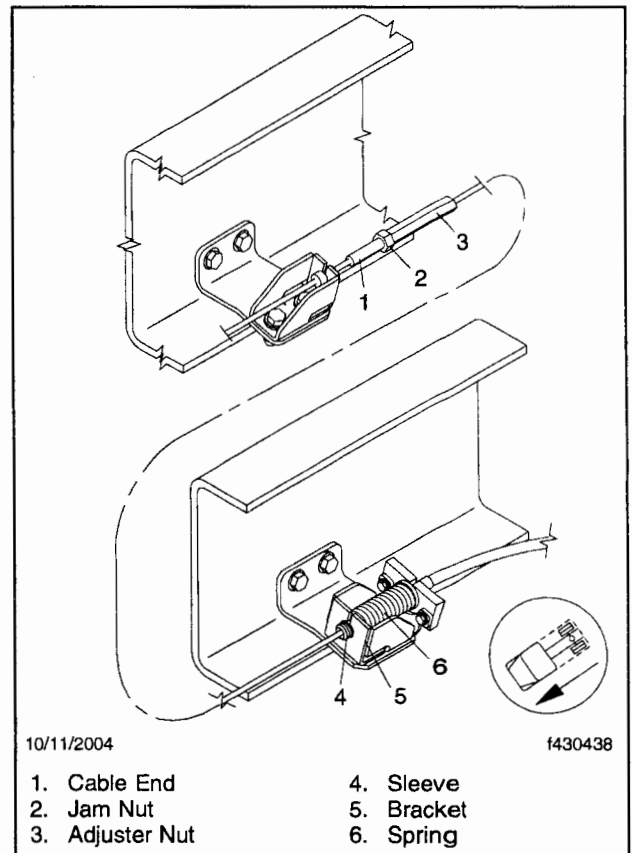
, Cable Adjustment, Foot-Pedal-Actuated Parking Brake
